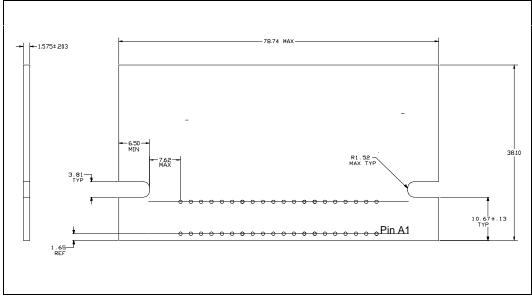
Voltage Regulator Module Printed Wiring Board Features (Viewed from connector side, dimensions in mm)
